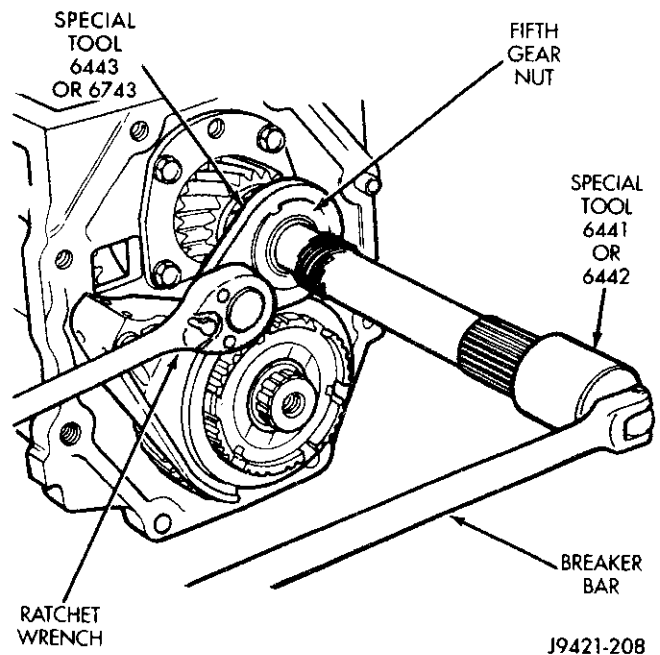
Removing Mainshaft Fifth Gear Nut From Shaft Threads
